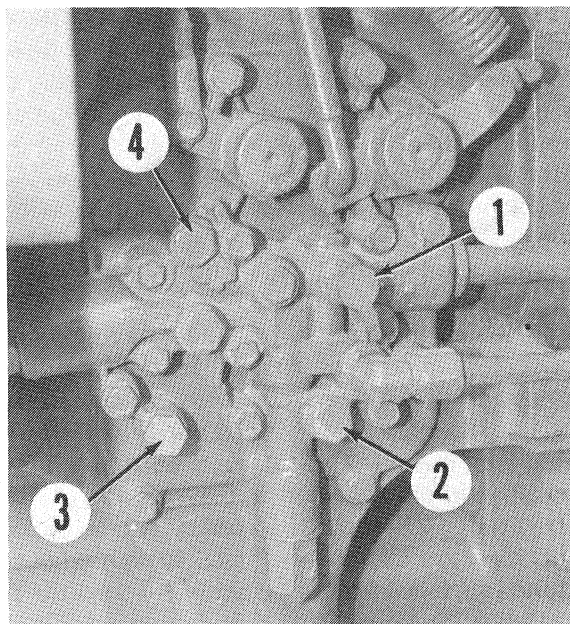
View of pressure control valve used on Quad-Range models. Install 300 psi (2000 kPa) pressure gage at test port (1) to check system pressure.
